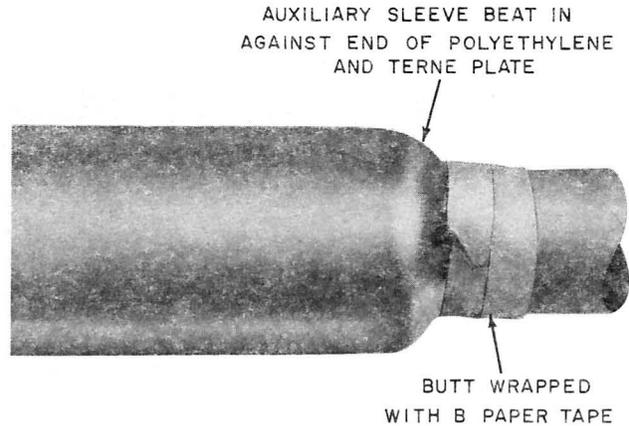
Auxiliary Sleeve After Lead Sleeve Has Been Removed
